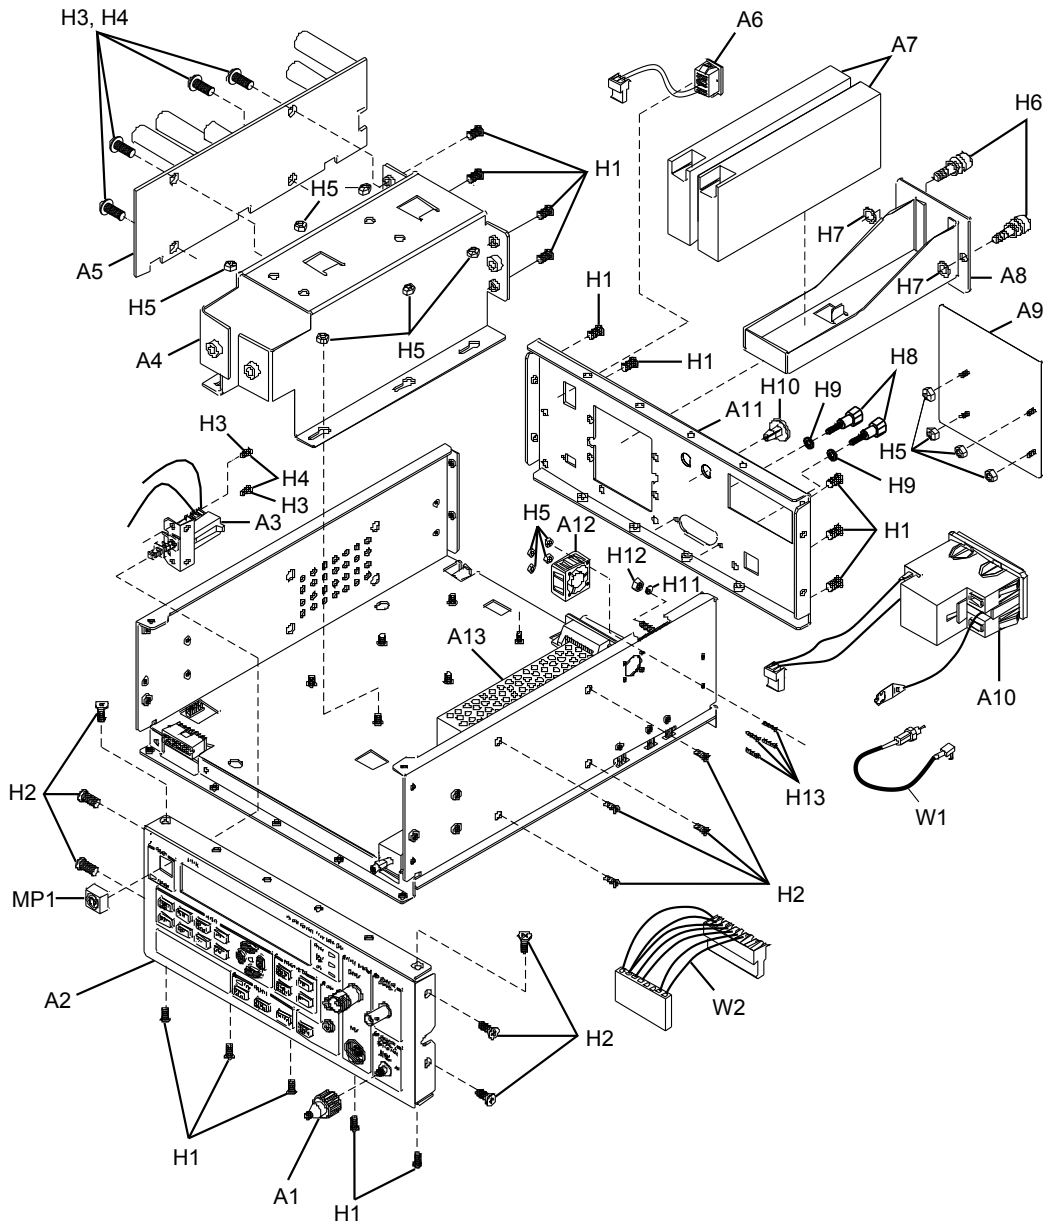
Keysight 53147A/148A/149A Exploded View – Internal Parts
